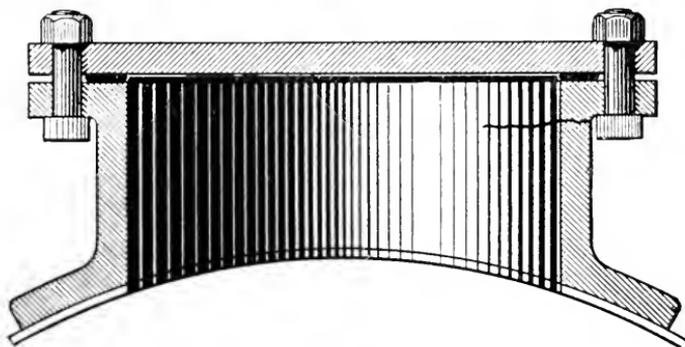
A CAST-IRON FLANGE WITHOUT BRACKETS.
